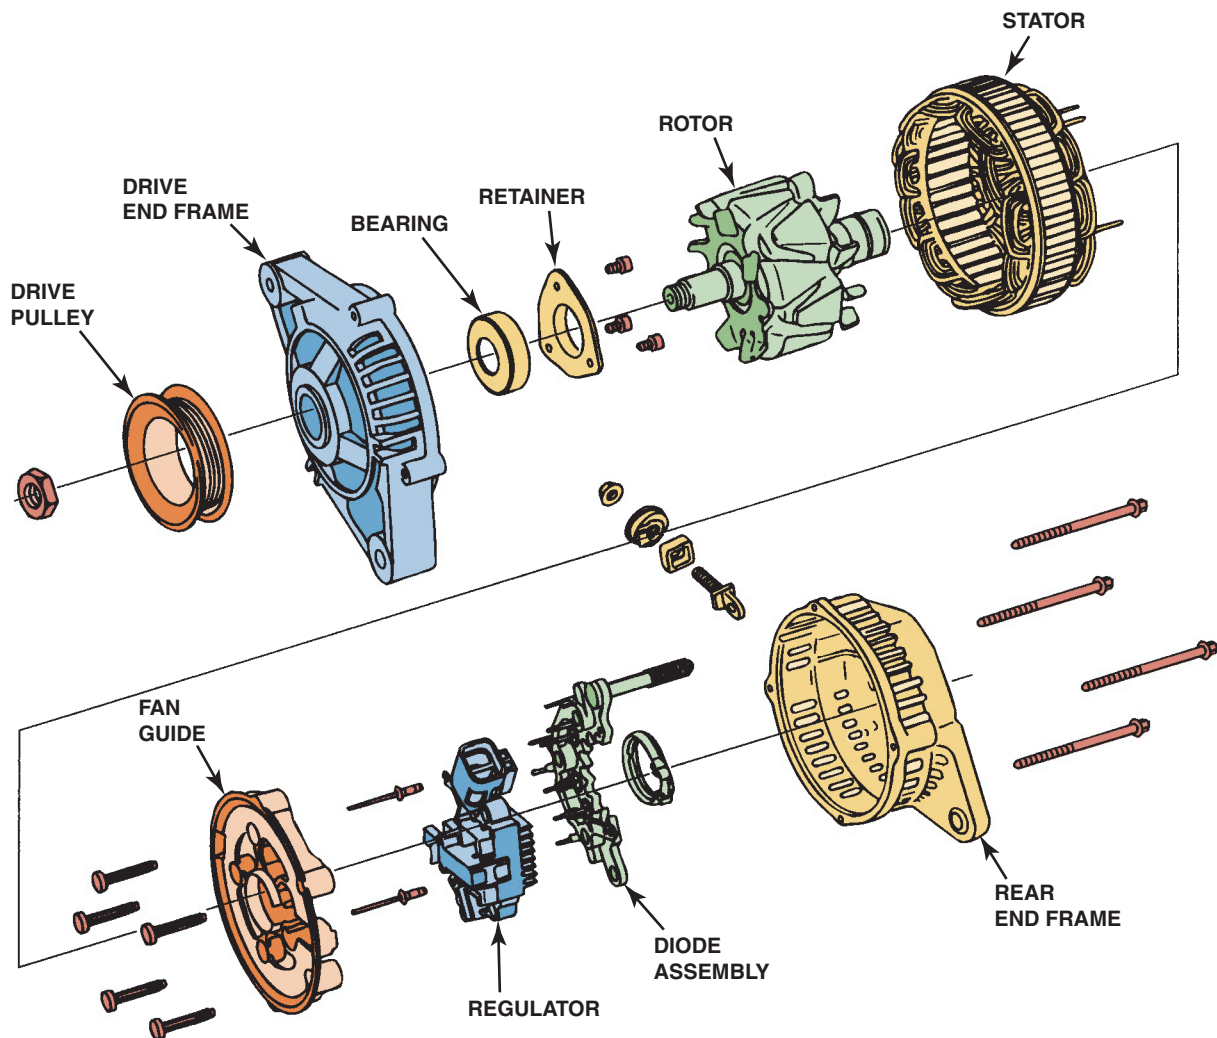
An exploded view of a typical alternator showing all of its internal parts including the stator windings.
